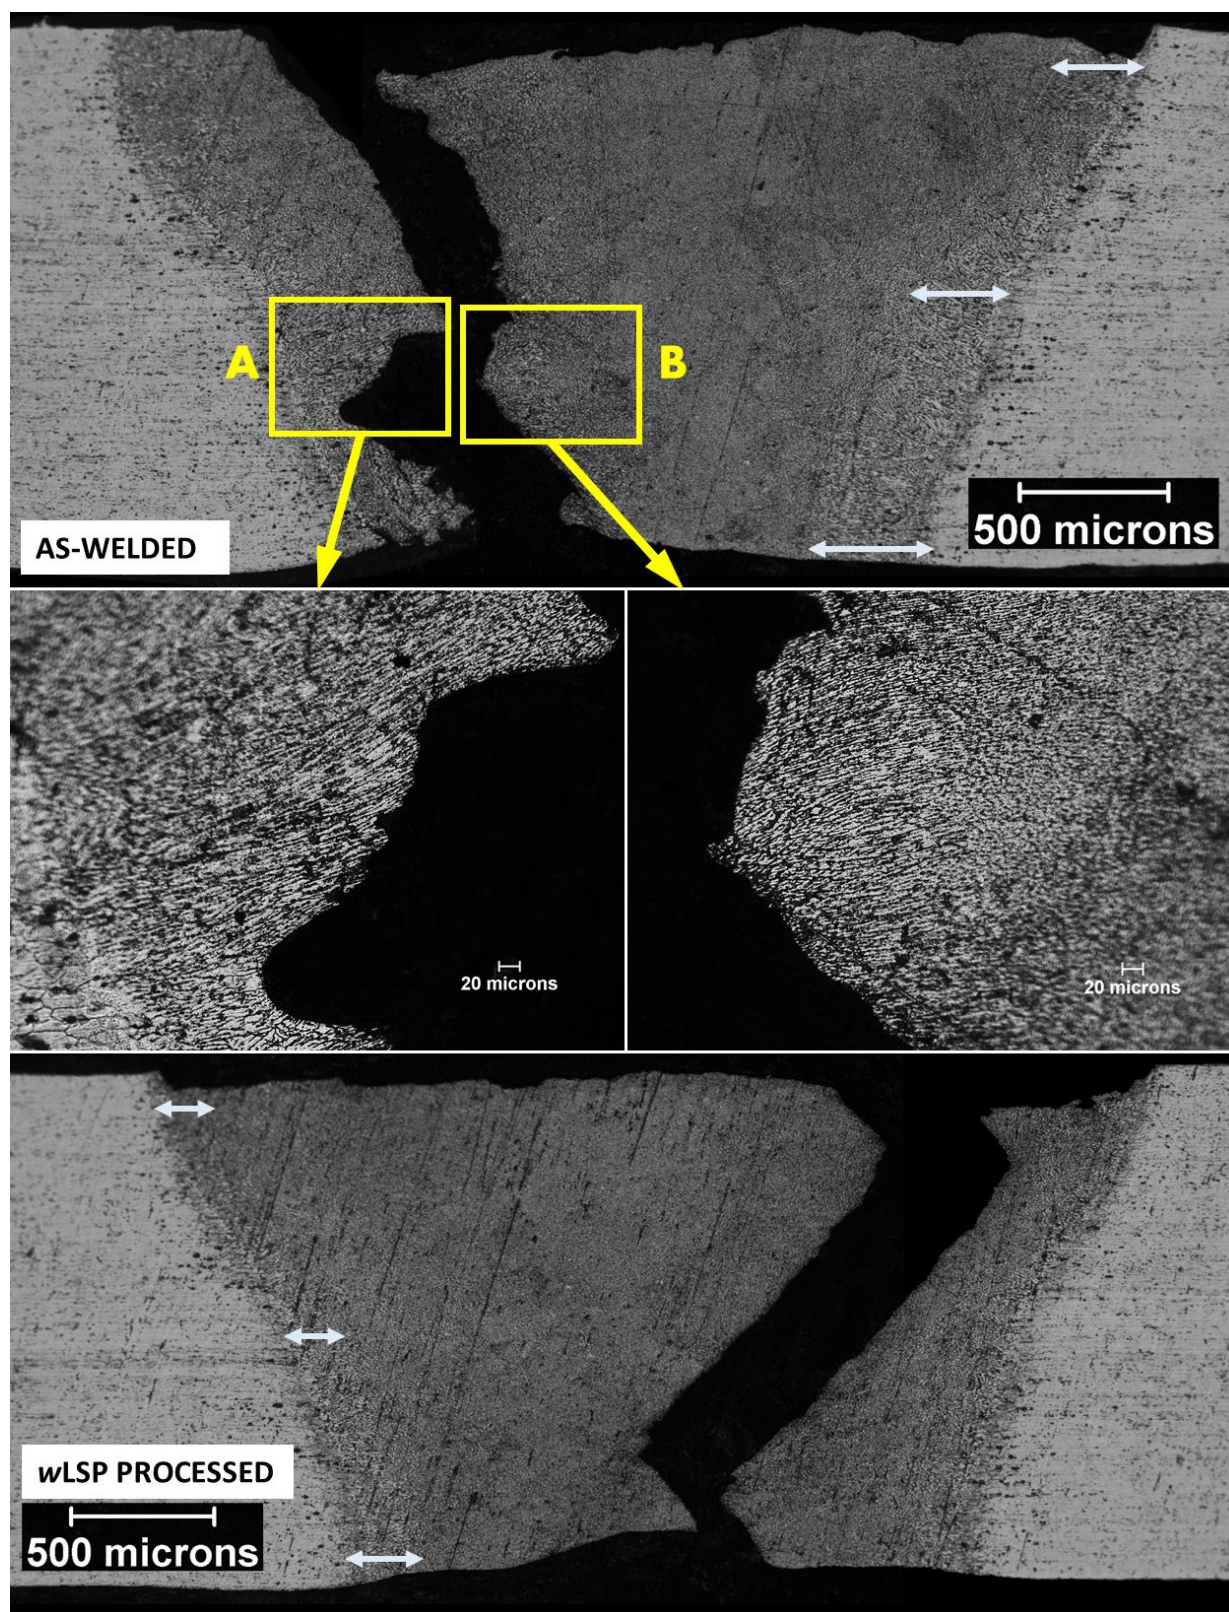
Failure morphology for as-welded and wLSP processed AA6061-T6 BOP joints
